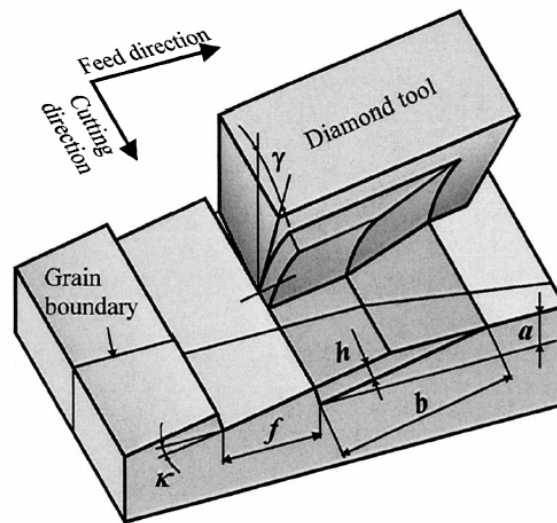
Machining model: a – depth of cut; h – undeformed chip thickness; f – feed; b – width of cut; κ – cutting edge angle (reproduced from Yan et al., 2004)
